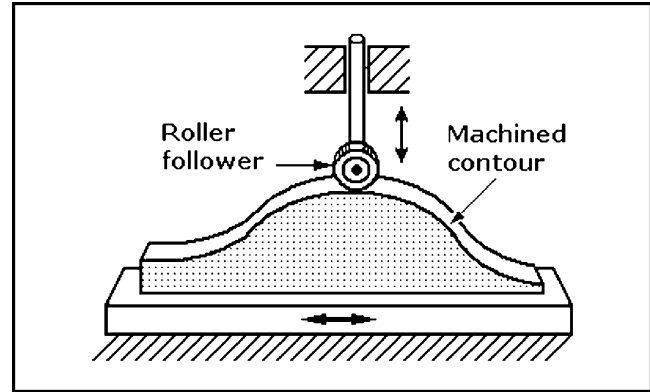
Translating cam: A roller follower either tracks the reciprocating motion of the cam profile or is driven back and forth over a stationary cam profile.
